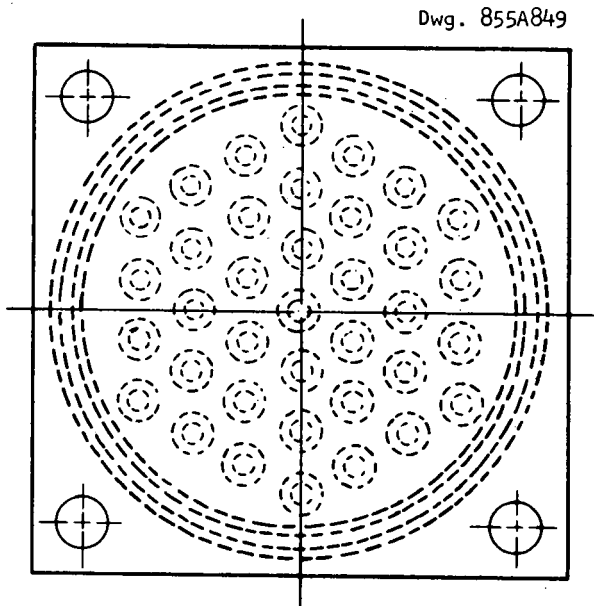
END VIEW OF FUEL CELL TUBE BUNDLE ASSEMBLY
